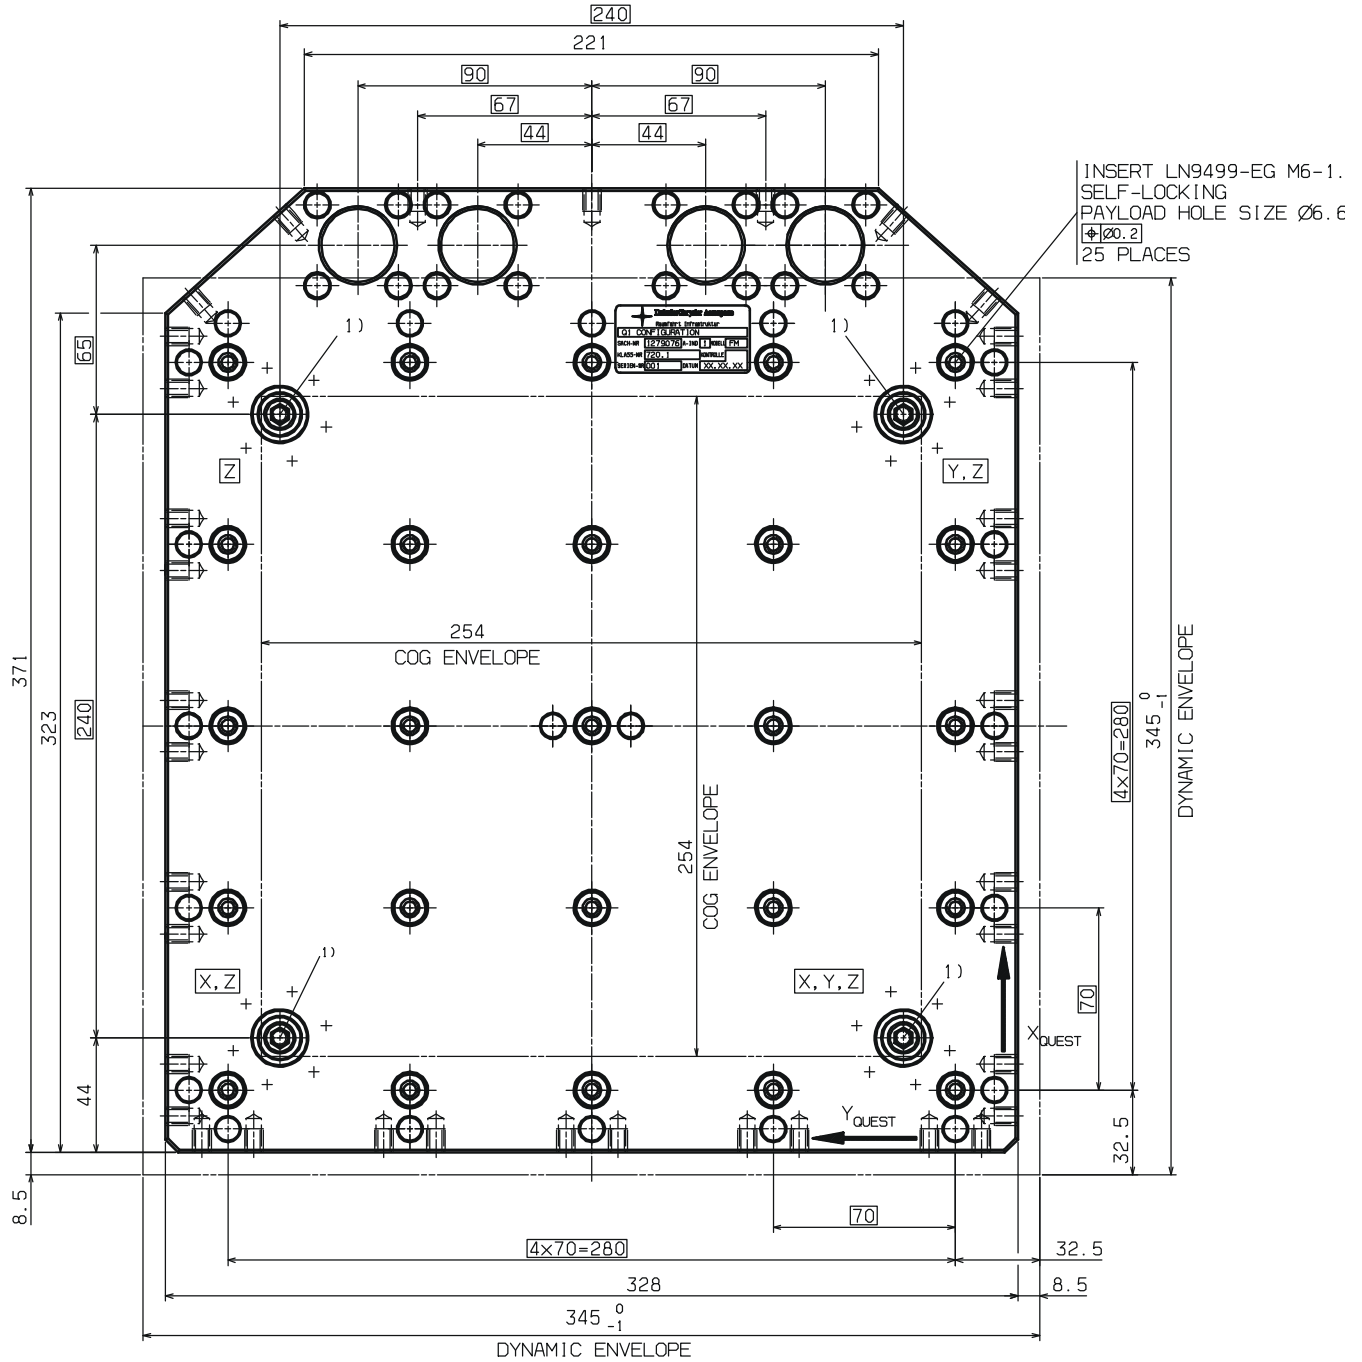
Payload Mounting Hole Pattern of the I/F Adapter
